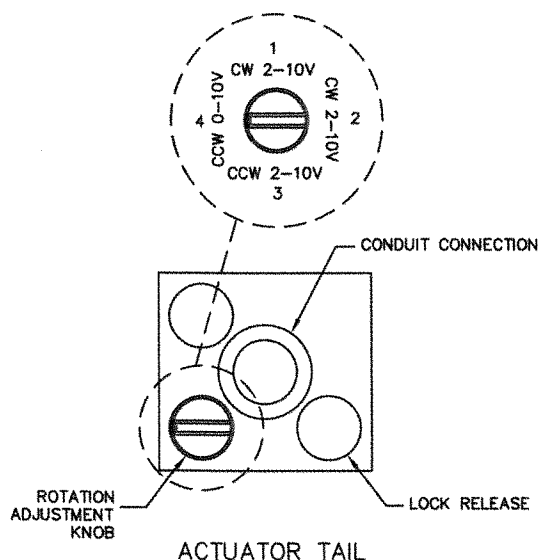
Elodrive Actuator — Rotation Knob Setting
